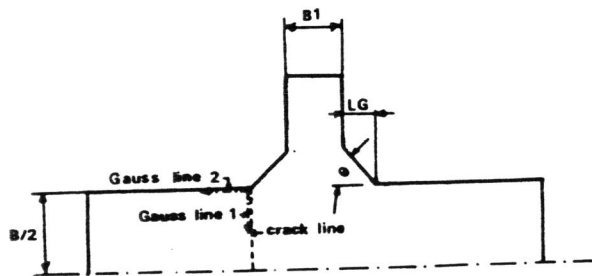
Nomenclature in the weld specimen (non-load carrying cruciform joint)
